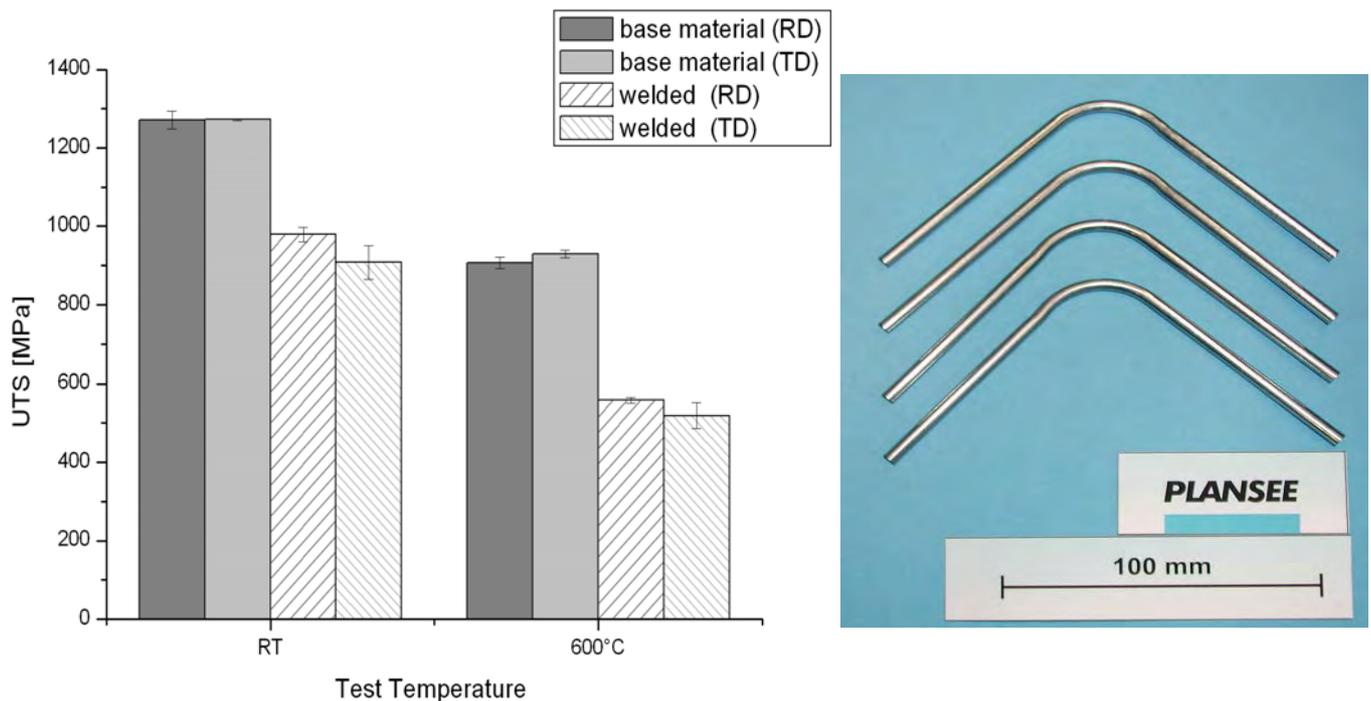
a) Tensile strength of flat specimens from Mo41Re (#0.2mm) in testing at RT and 600°C; and b) welded tubes after bending test
